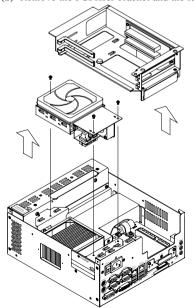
Removing the PCI Riser Bracket, FAN Bracket
